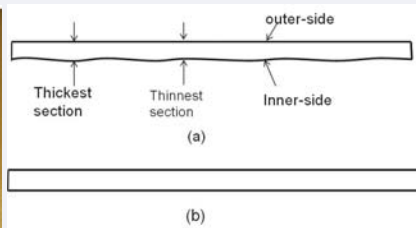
a) Geometrical surface of outer wire including irregularities. b) Geometrical surface of smooth centre wire
